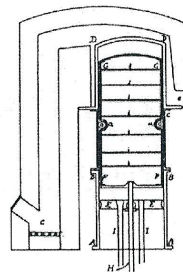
Cross-section view of cylinder, Stirling 1816 engine. (From the patent drawing)
